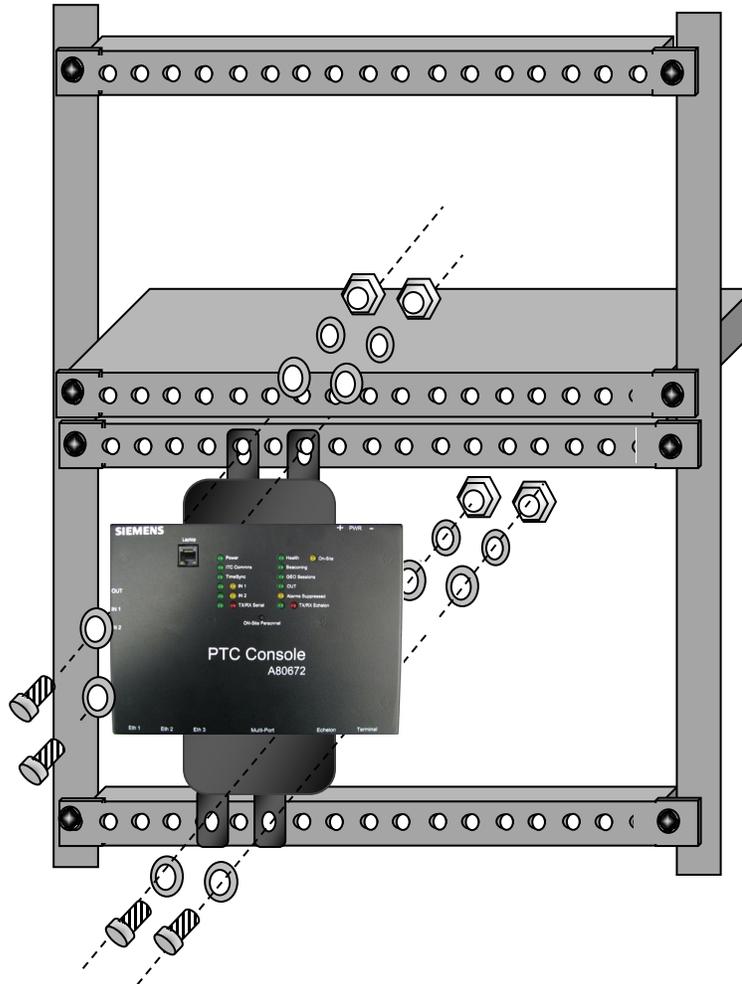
Mounting the PTC Console to a Rack Assembly
